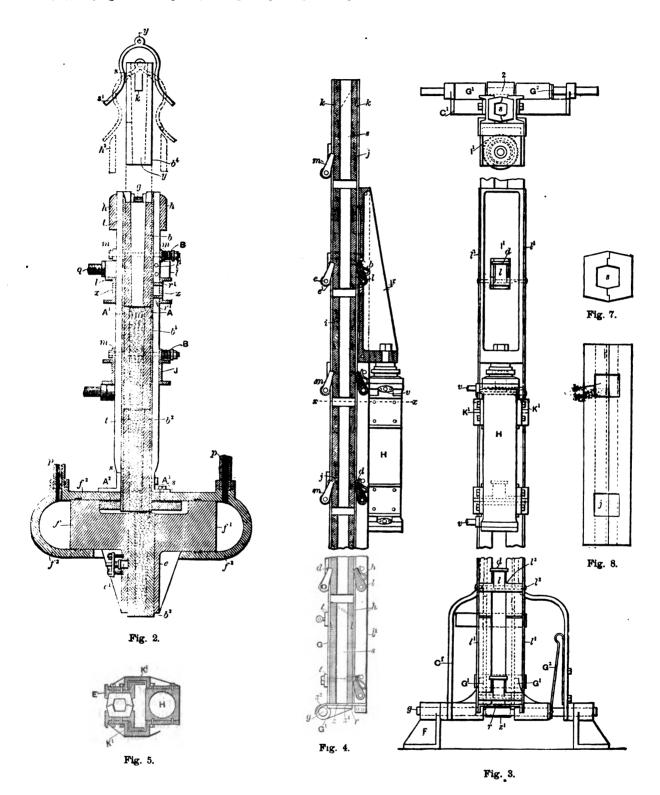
Vertical Section through Cylinder D, Fig. 1. Fig. 3.—Elevation of Elevator. Fig. 4.—Longitudinal Section on Center Line, Fig. 3. Fig. 5.—Transverse Section on Line x x, Fig. 4. Fig. 7.—Plan of Mold. Fig. 8.—Side View of Mold.
